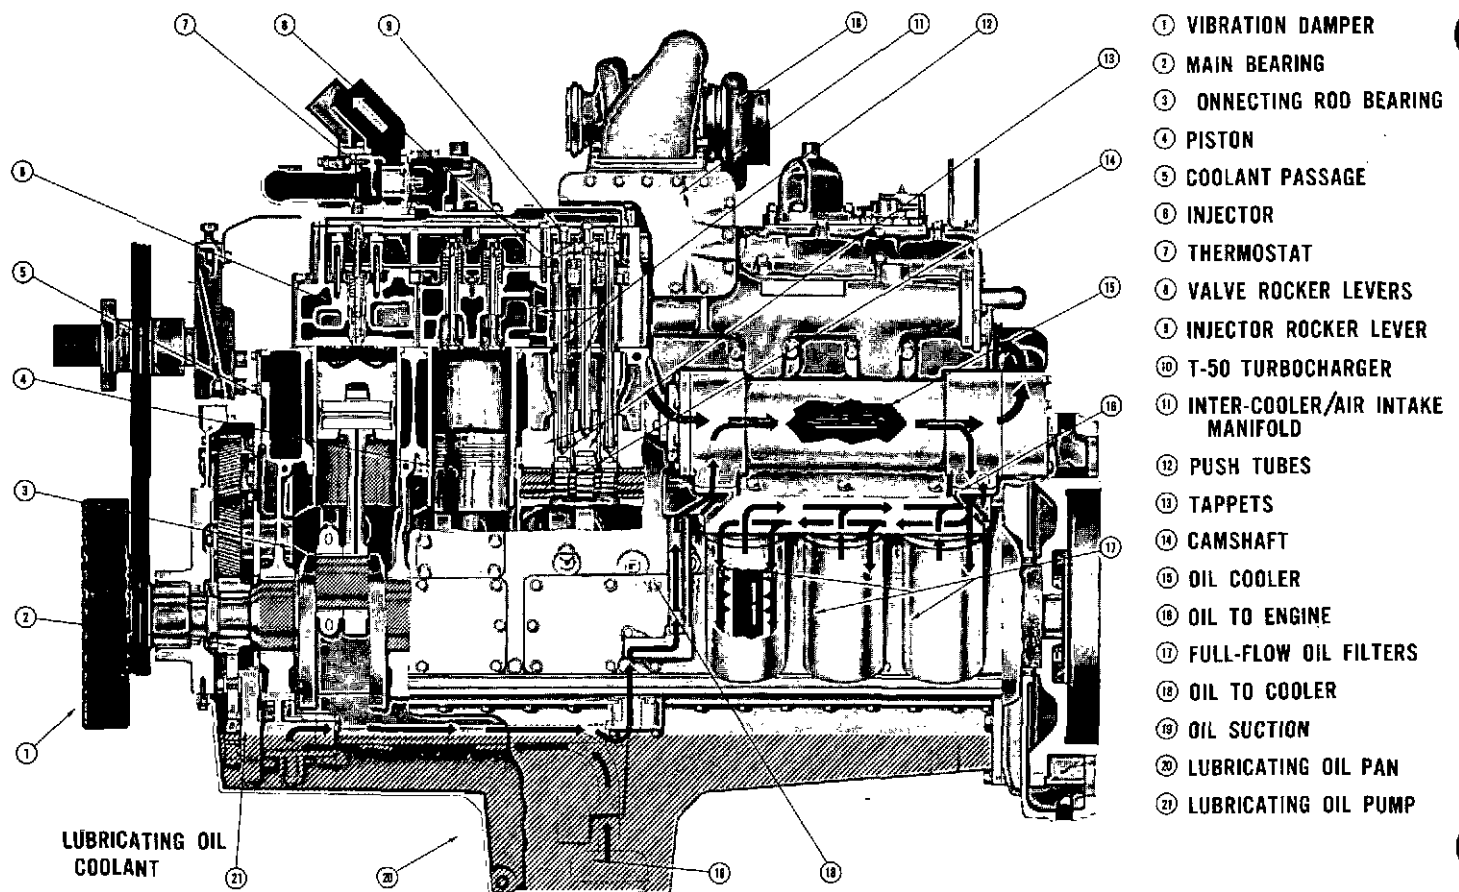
, CWC13. Lubricating oil and coolant flow — side view
